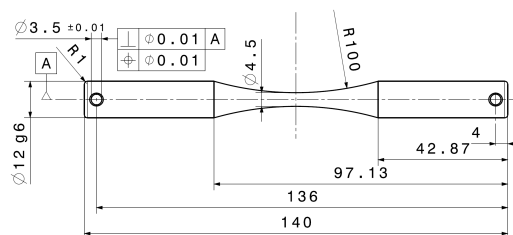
CNC drafting of a 4,5 mm Mini-UB specimen
